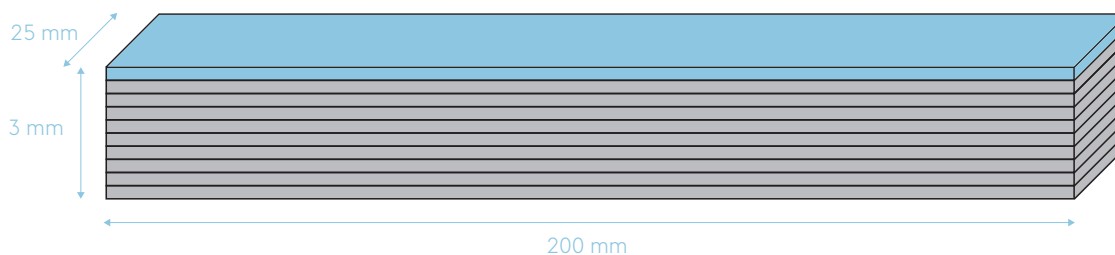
Geometry of test specimens for the testing of adhesion in the floating roller test
